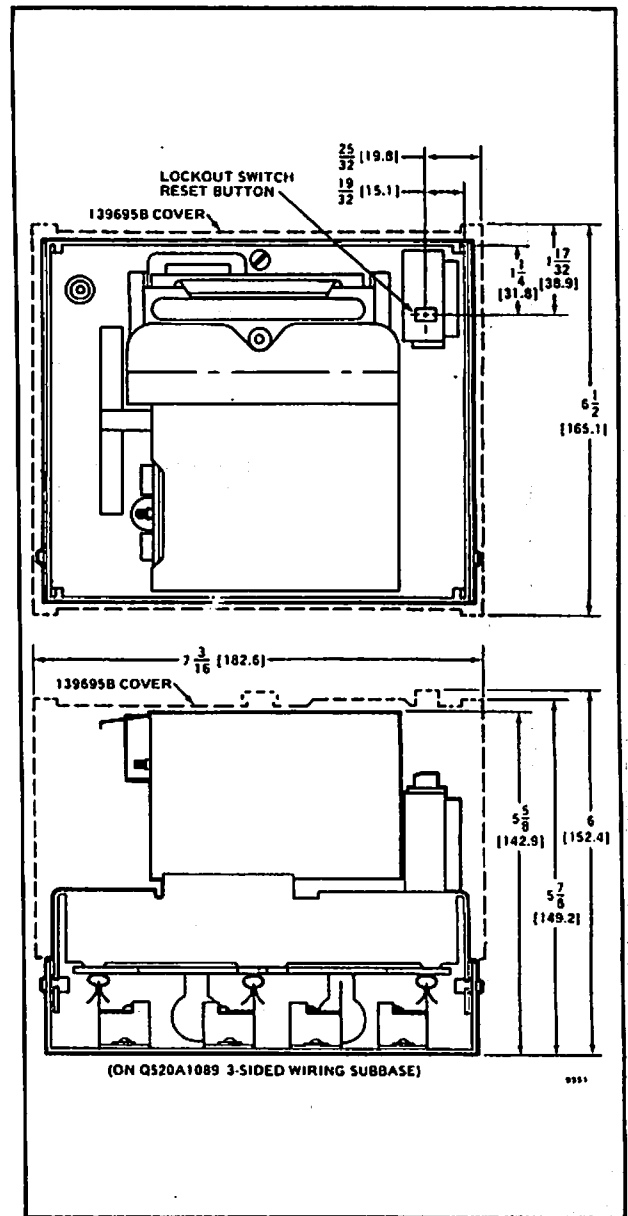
MOUNTING DIMENSIONS OF THE R4140 PROGRAMMER ON THE Q520A WIRING SUBBASE, IN in. [mm SHOWN IN BRACKETS].
